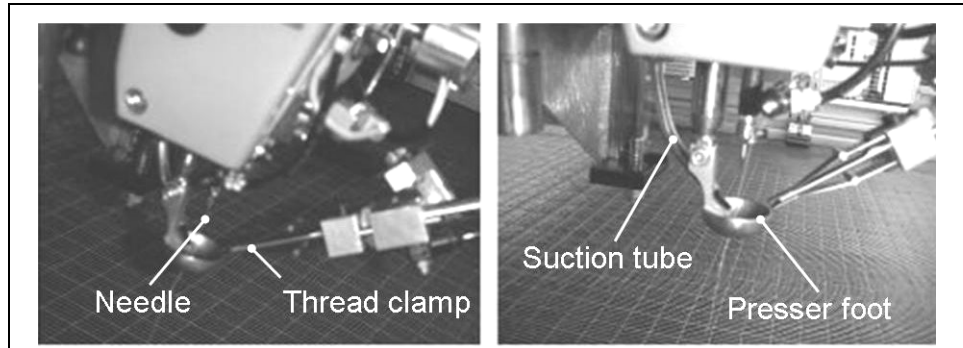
Suction attachment for holding thread end just after the cutting.
